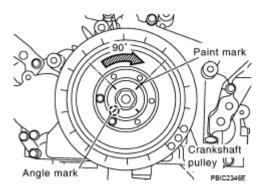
Identifying Paint Mark On Crankshaft Pulley Courtesy of NISSAN MOTOR CO., U.S.A.
